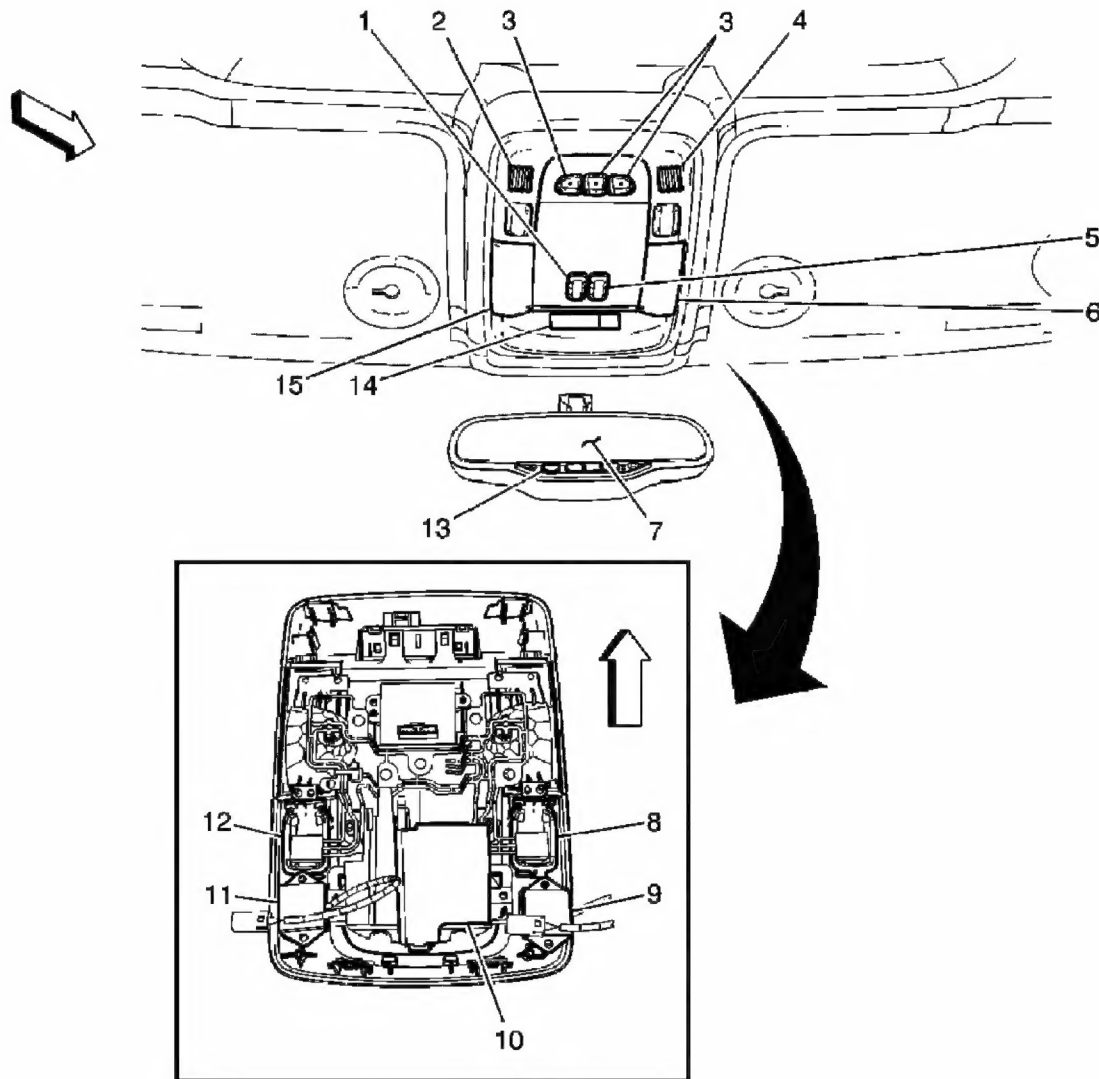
Identifying Overhead Console & Inside Rearview Mirror Components
